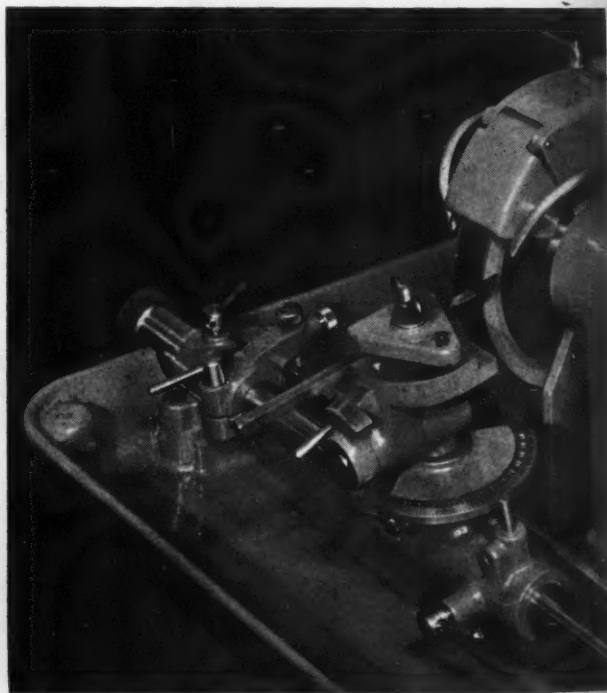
Close-up View of Tool Grinding Set-up on Machine Shown in Fig. 1
